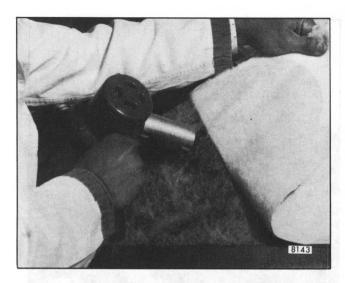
Separating Wrinkled Area from Roof Panel - Heat Application
